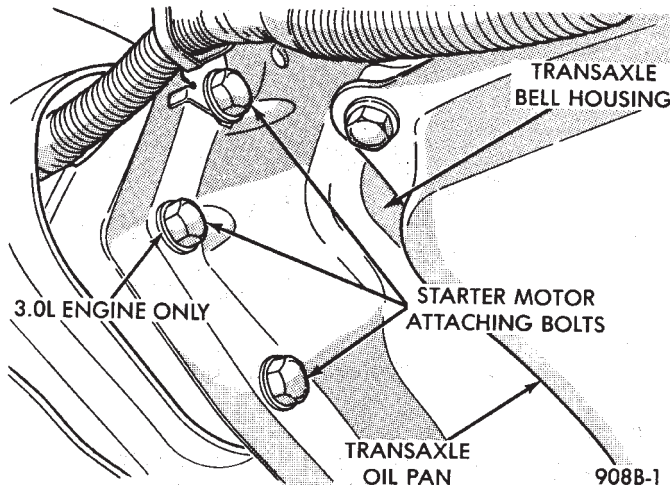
Bosch Starter—2.2L/2.5L Engine
